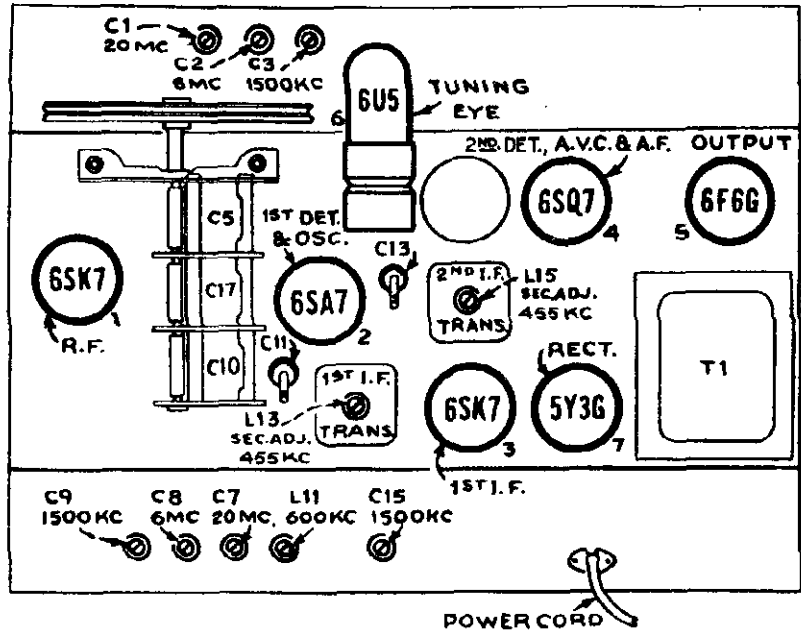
TUBE, TRIMMER AND PARTS LOCATION
